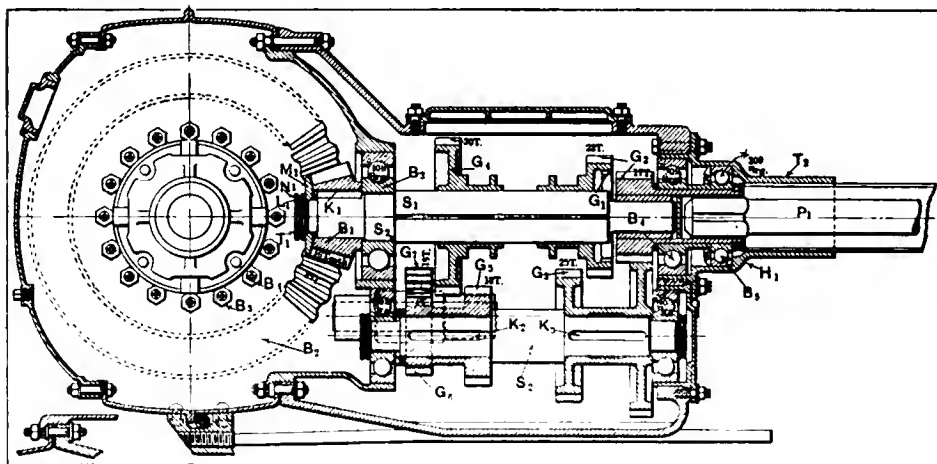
Section through rear axle and transmission gear, showing annular ball bearings, well-designed gears, and short, stubby shafts
